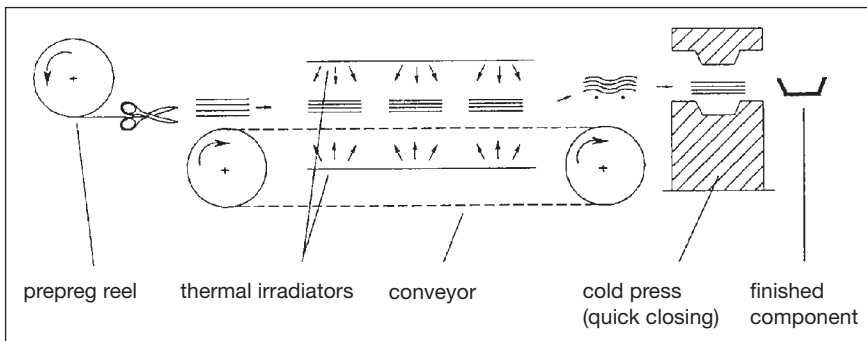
The manufacture of components using VESTOPREG and a cold forming press (Hüls).
